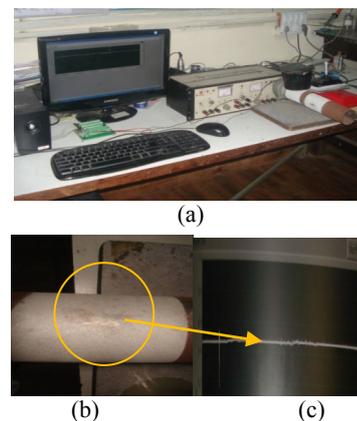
Defect detection using a data acquisition system for the sensor: (a) photograph on-line monitoring of the defect using the DAS and sensor probe, (b) pipe with non uniform coating and (c) defect monitoring using NI and LABVIEW using the NI card for defect inspection.
